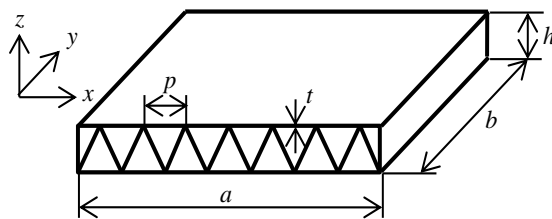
Dimensions and coordinates for a double-skin hollowed panel
